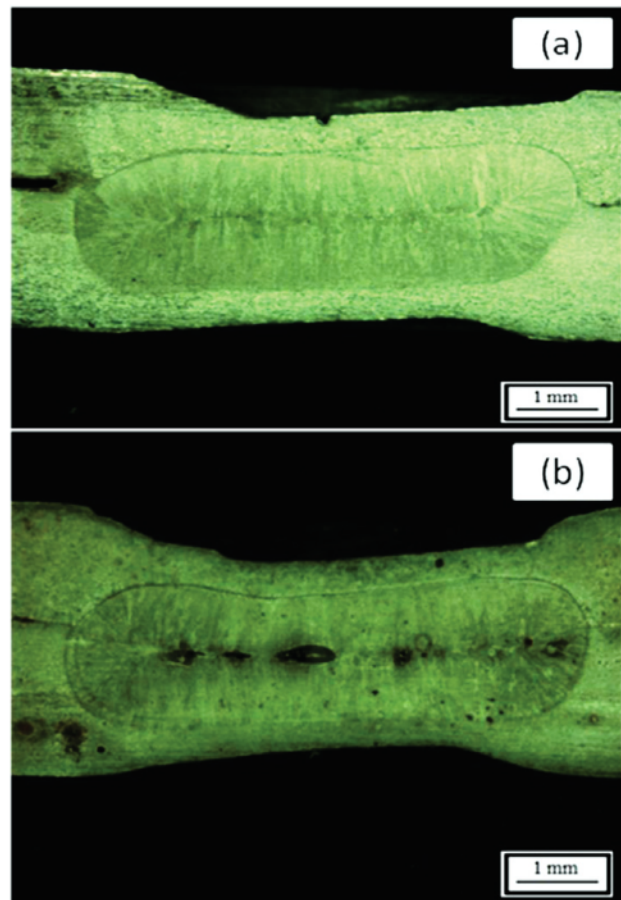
Macrostructure samples: a) sound spot weld, b) defective spot weld
